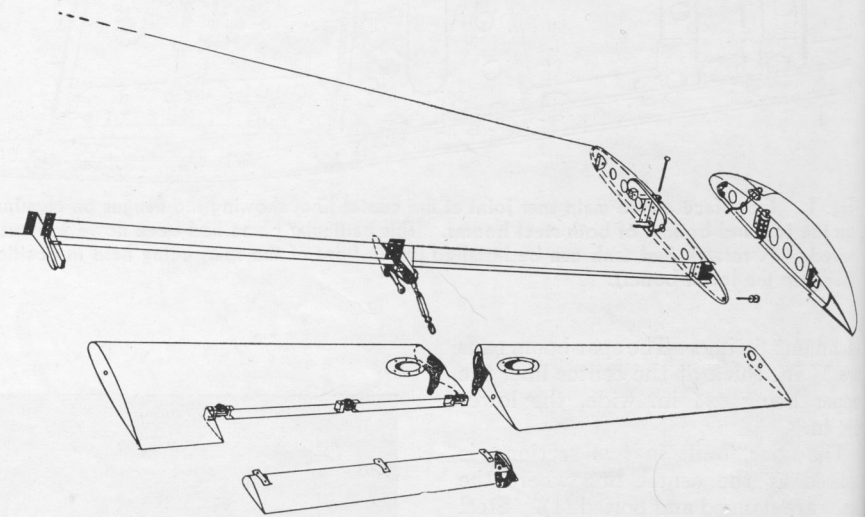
Exploded view of a wing tip, two-section aileron, and aileron trim tab.
